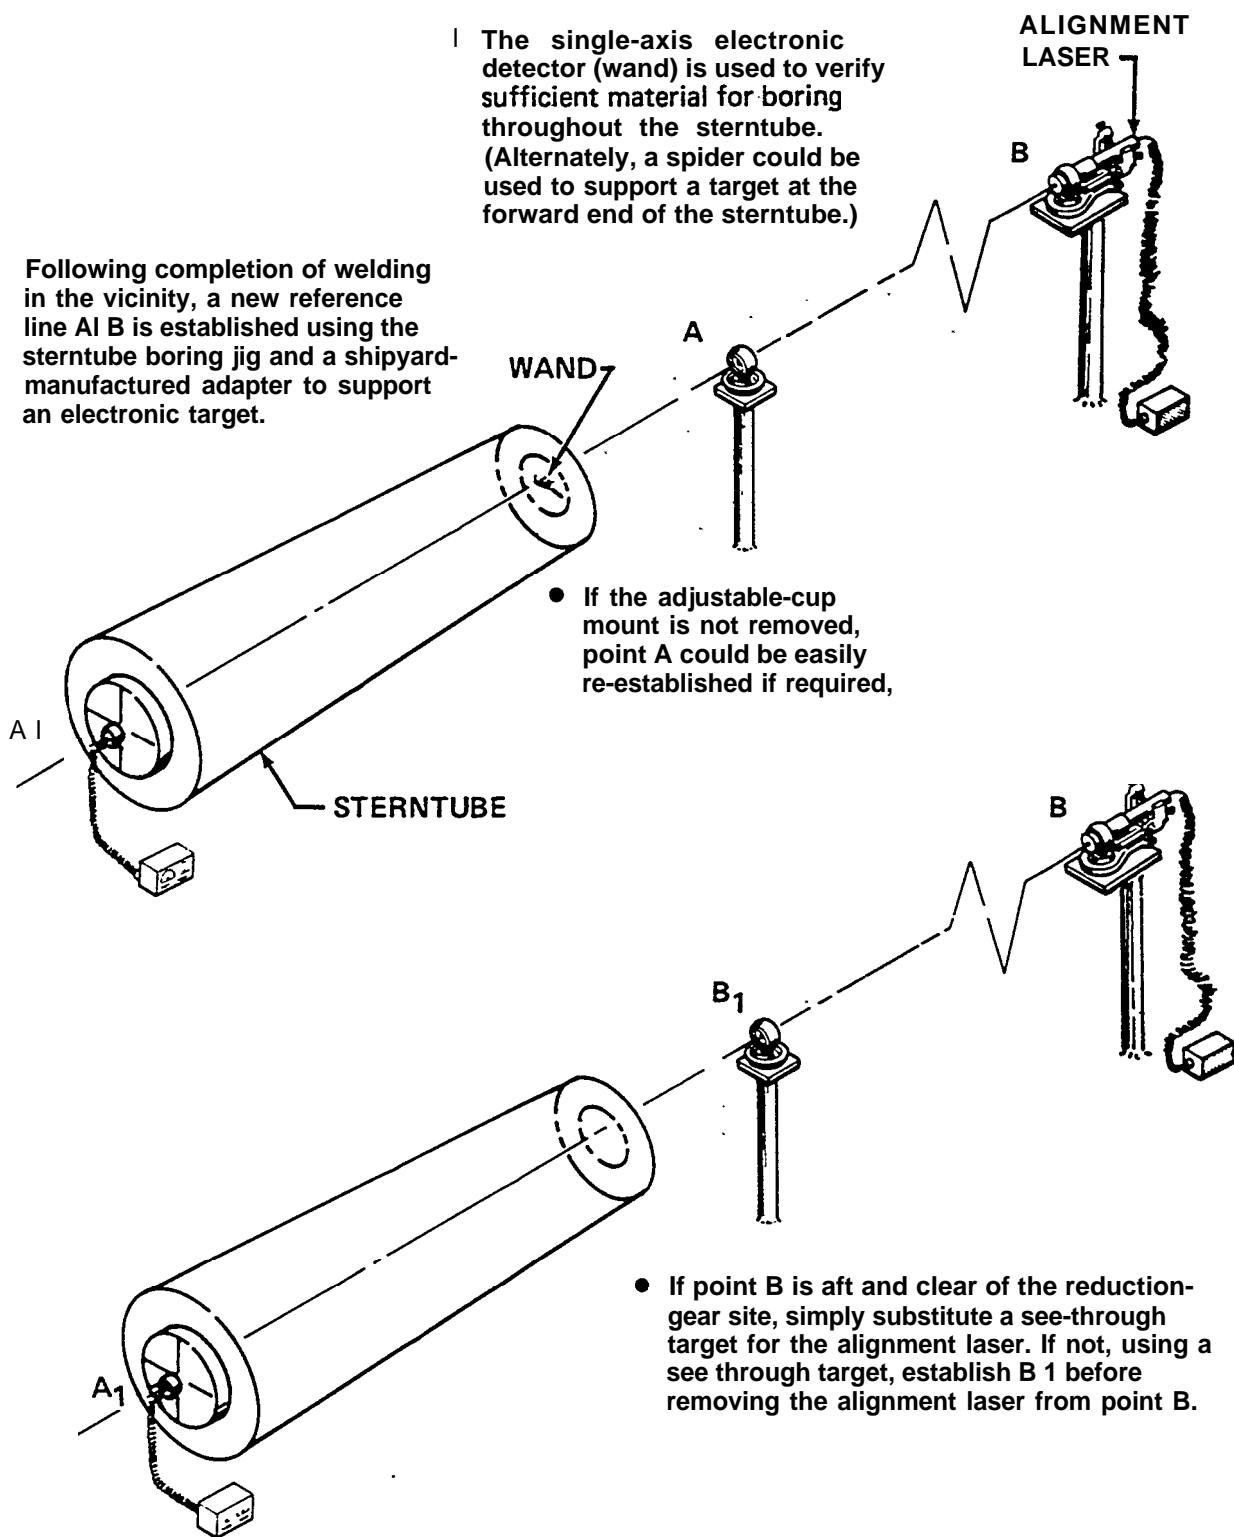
Establishing a Reference Line for First Positioning Reduction Gear (Hollow Shaft)
